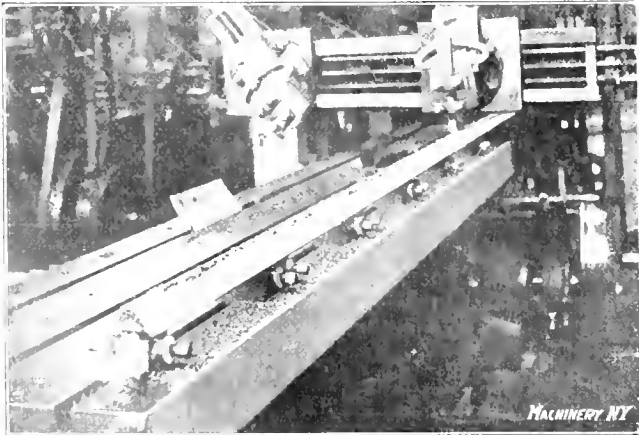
Sample Form of Fixture for Holding Gibs on the Planer
